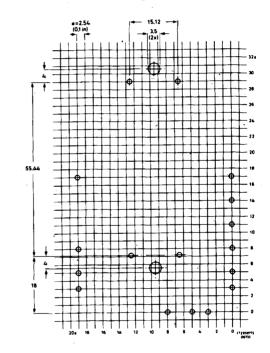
Hole pattern for mounting on a printed-wiring board (solder side) Grid hole diameter 1.3 ± 0.1 mm
